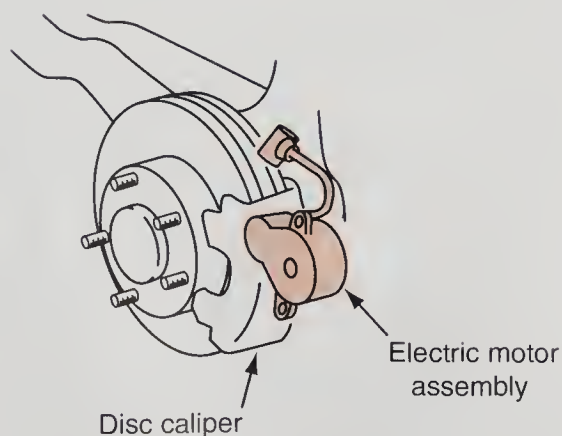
The electric motors are connected to the caliper and its adapter.
